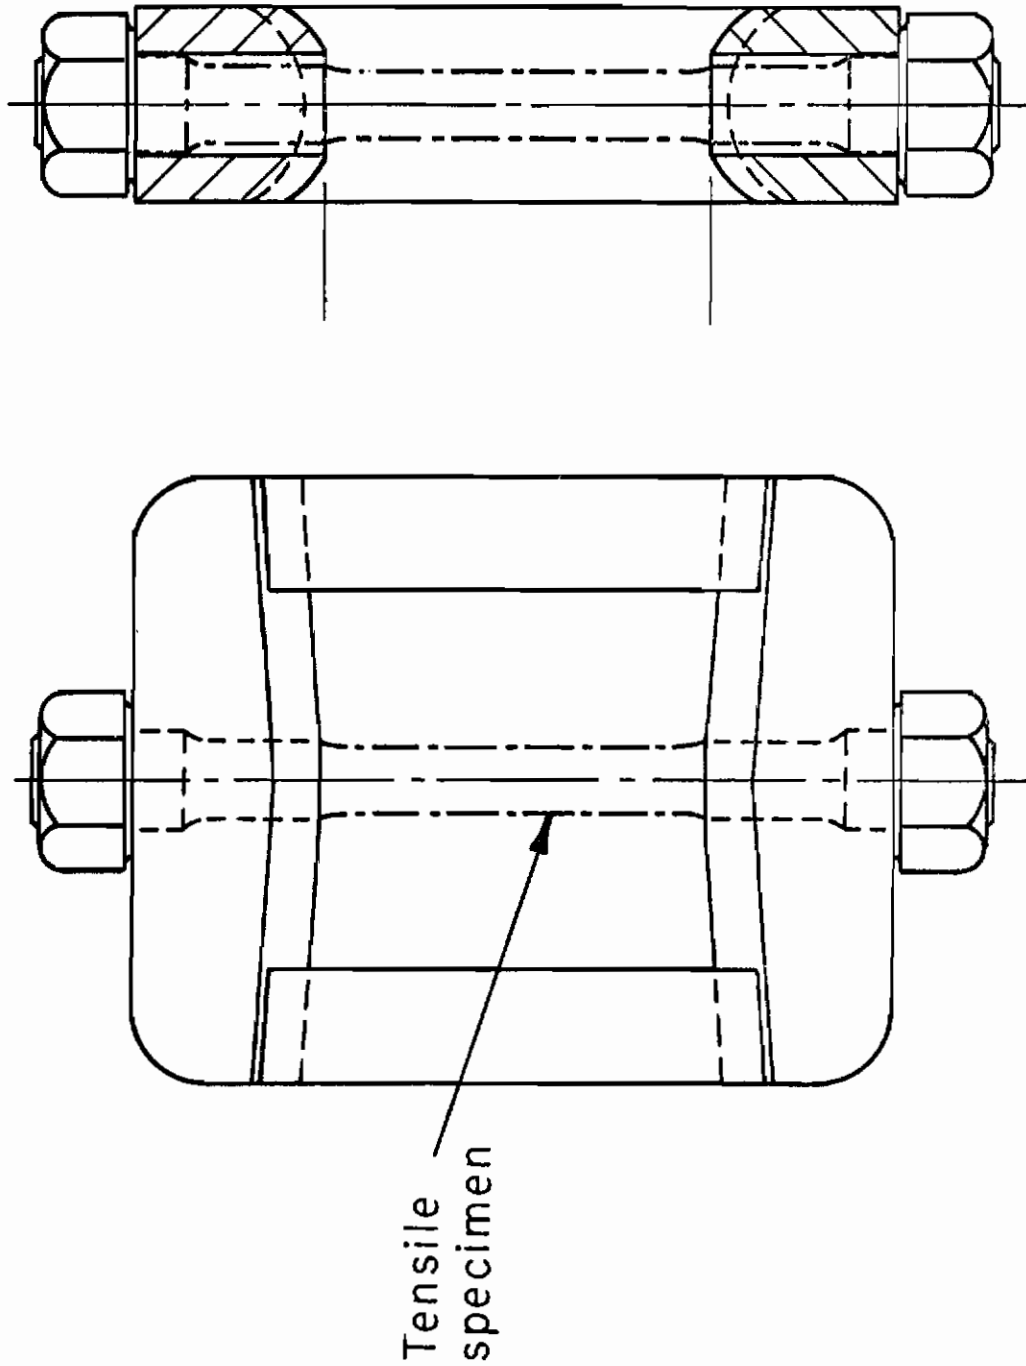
Stressing Frame for Stress Corrosion Tests of Tensile Specimens.
